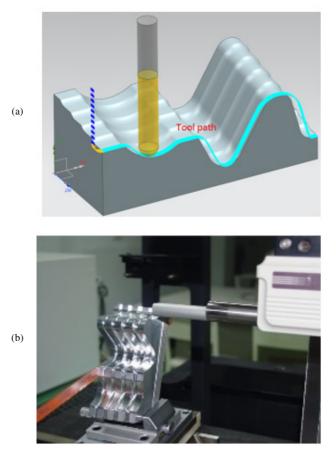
(a) Schematic of the machining path along the profile, (b) measuremens of surface roughness.
